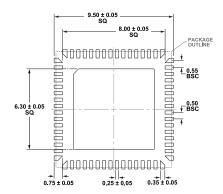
64-Lead Lead Frame Chip Scale Package [LFCSP\_SS] 9 mm × 9 mm Body, With Side Solderable Leads (CS-64-2) Dimensions shown in millimeters
